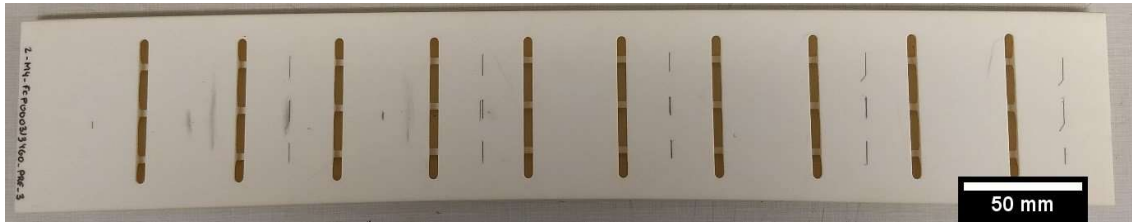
Bottom face of a dense MMA manifold component supplied by LGFCS
